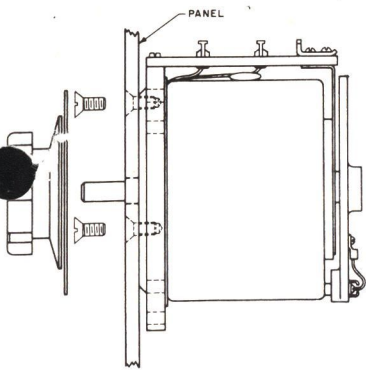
Standard panel mounting, single unit, using tapped holes.
